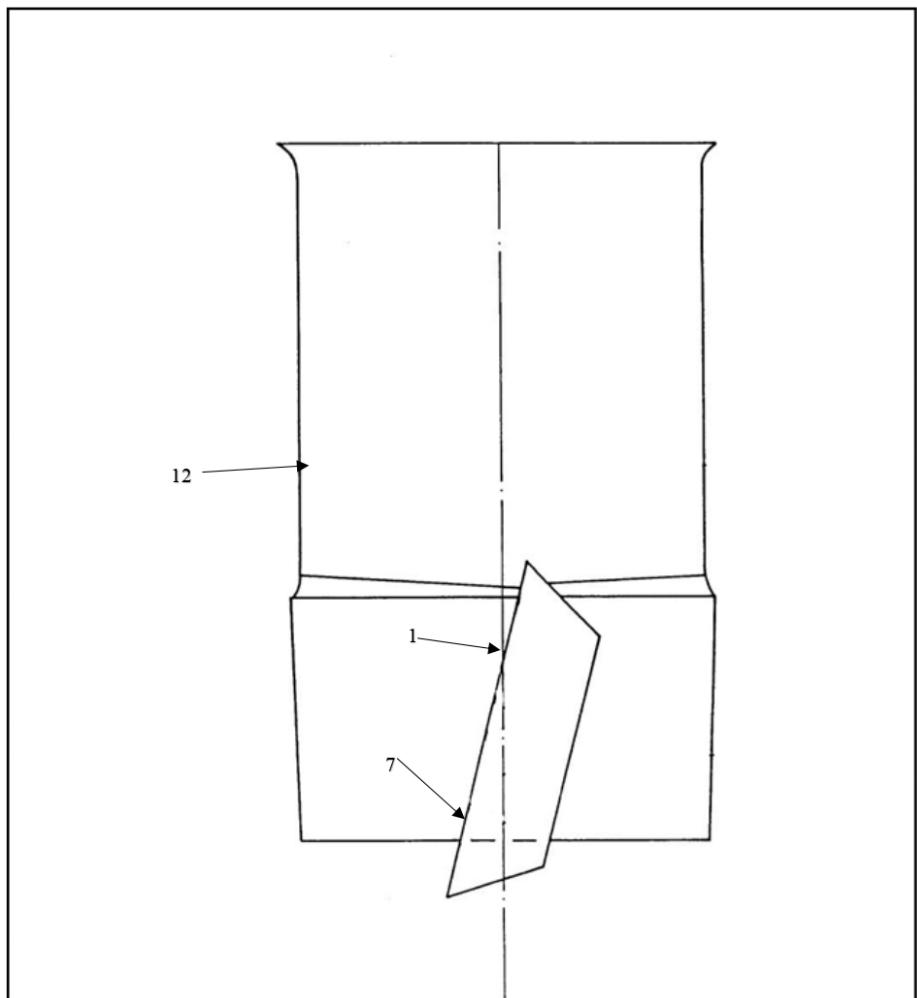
Schematic side elevation of milling cutter with fixed cutting insert as per the invention
